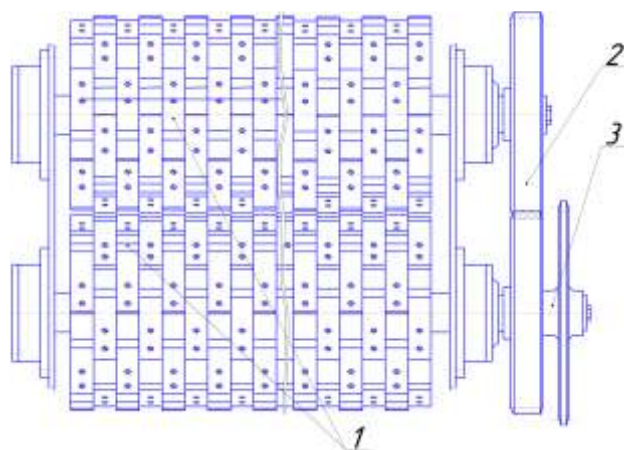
Grinding device: 1 – Grinding shafts; 2 – Gear transmission; 3 – Shaft drive sprocket.
